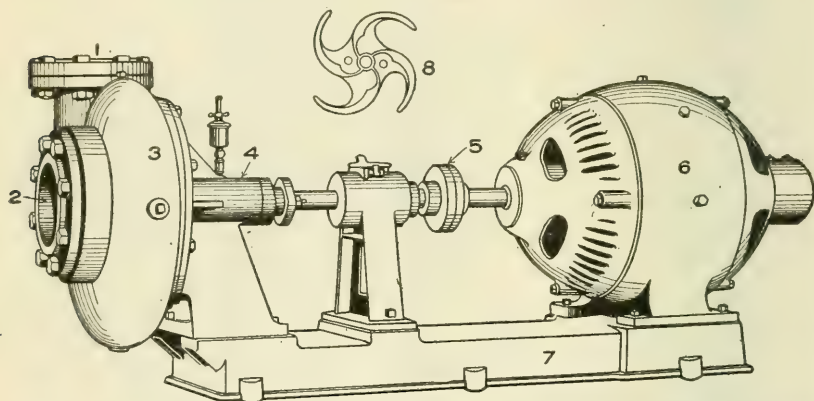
Single-stage centrifugal pump direct connected to electric motor, showing an open-type impeller. 1, Discharge; 2, suction; 3, pump volute or case; 4, stuffing box; 5, coupling; 6, electric motor; 7, base; 8, impeller.
